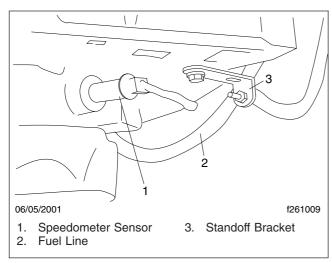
, Fuel Line Standoff Bracket and Speedometer Sensor
